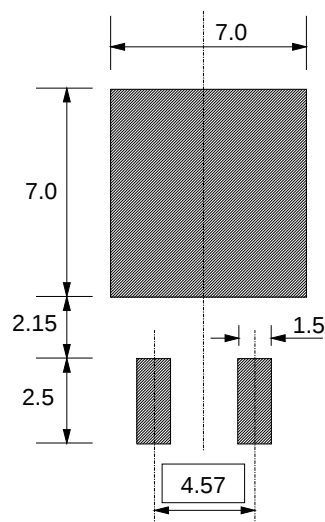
SOT428 : minimum pad sizes for surface mounting.
